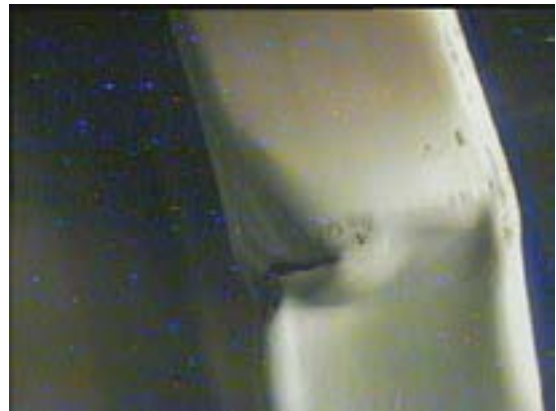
and FIG. 7. Distorted fuel assembly No. 7-35.
